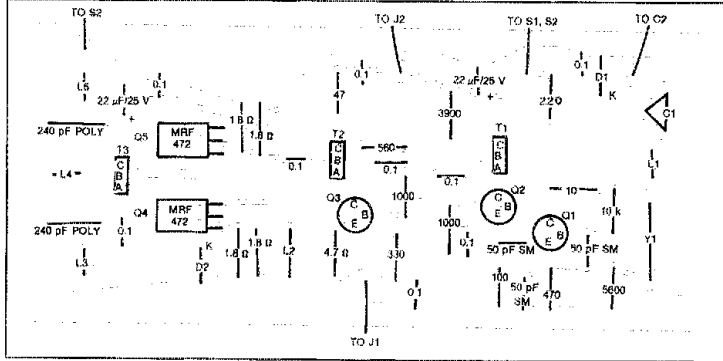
Parts-placement diagram for the transmitter circuit board. The board has foil on both sides, the side on which the components are mounted being only a groundplane. Component-lead clearance holes in the groundplane may be etched or drilled. The shaded area here represents an X-ray view of the interconnecting copper pattern, shown in the "Hints and Kinks" section of this issue. Whole-number values with no units represent resistances in ohms. K indicates the cathode of a diode. Transistors Q4 and Q5 are mounted to the board using mica insulating washers and silicone grease. POLY = polystyrene; K = cathode; SM = silver mica.
